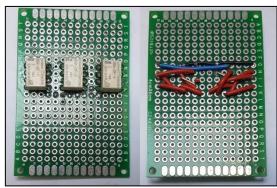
Mounting the G6K-2F-Y-5VDC relays, with the cabling soldered on the back-site
